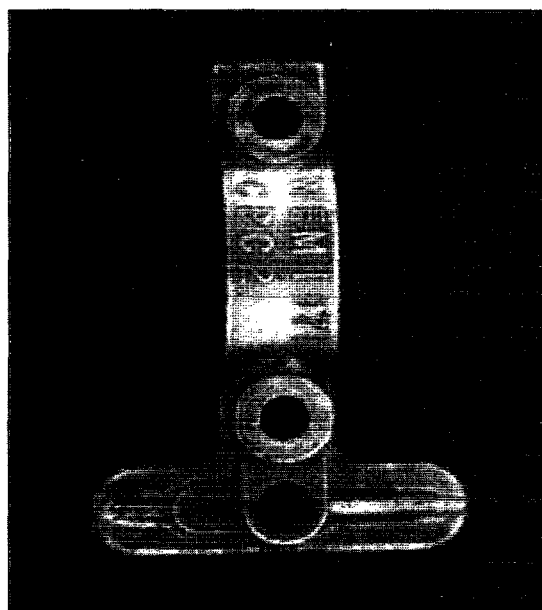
Sample bitmap image of the Rover camshaft bearing cap.
